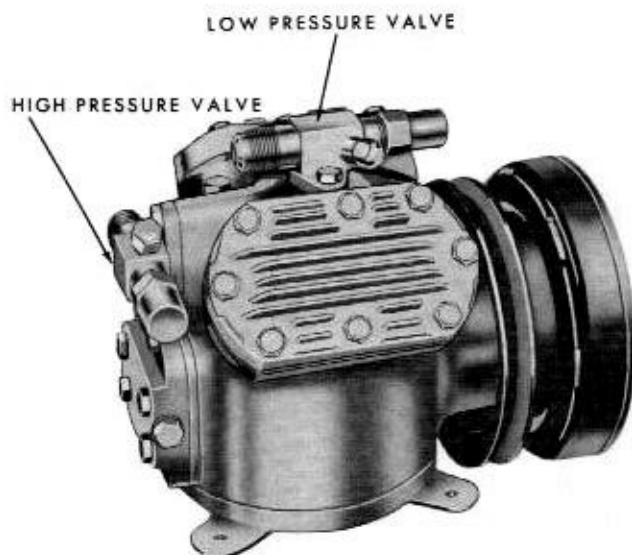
C-2—Lincoln 4 Cylinder A/C Compressor
